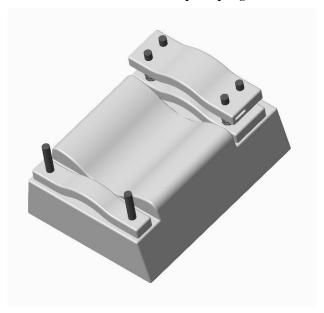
A CAD assembly of the two-bracket version of *Iteration IV* with push springs.
